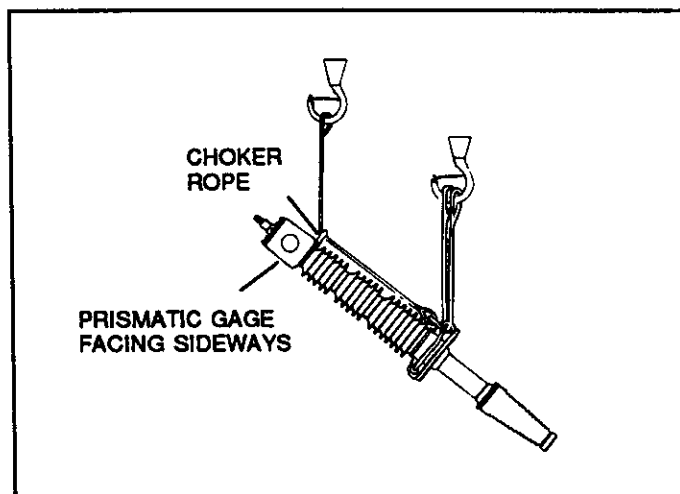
C: Method of mounting a bushing at an angle and orientation of the prismatic glass oil level gage.
